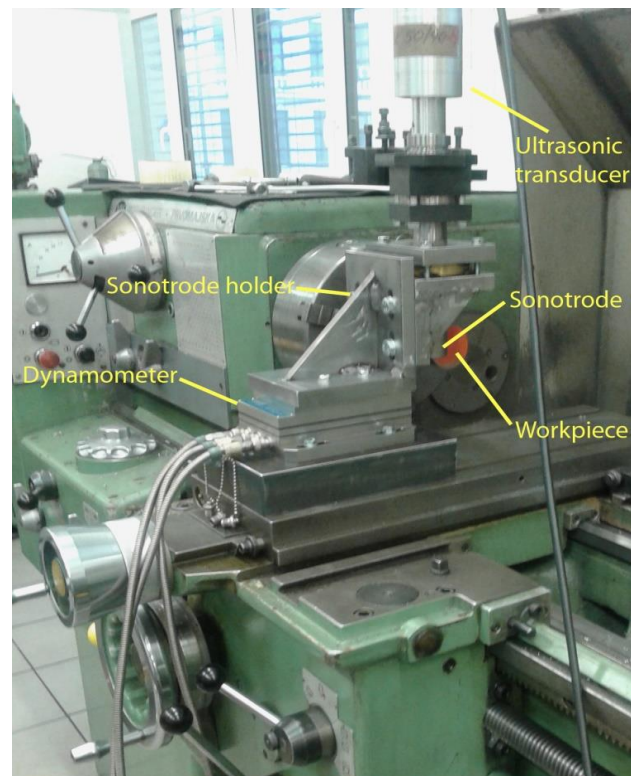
Assembly of sonotrode on the lathe with Kistler dynamometer and ultrasonic transducer
